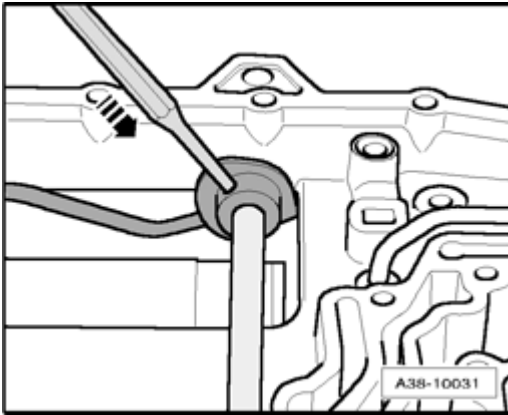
Driving Roll Pin For Operating Lever For Parking Lock Downward
